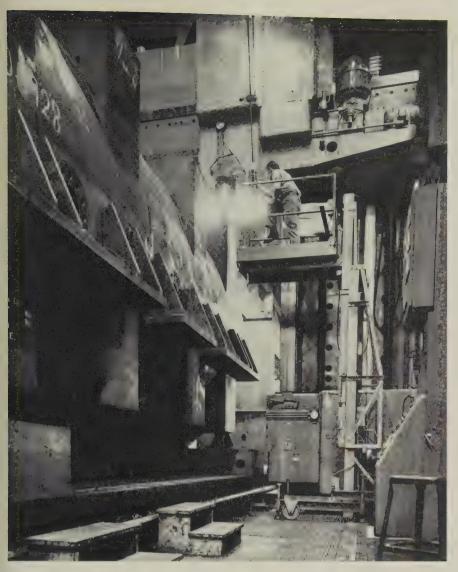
Adjustable rail milling machine—it beat performance guarantees
